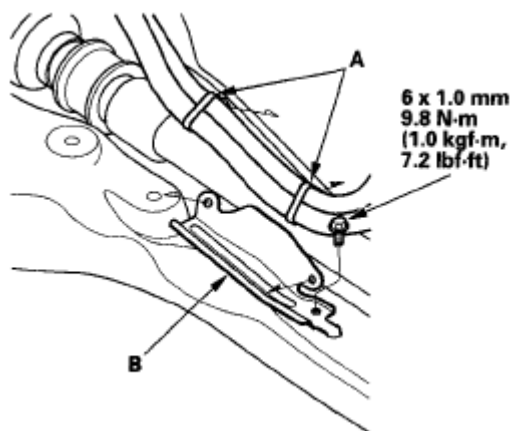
Identifying Harness Clamp Bracket (With Torque Specifications)
